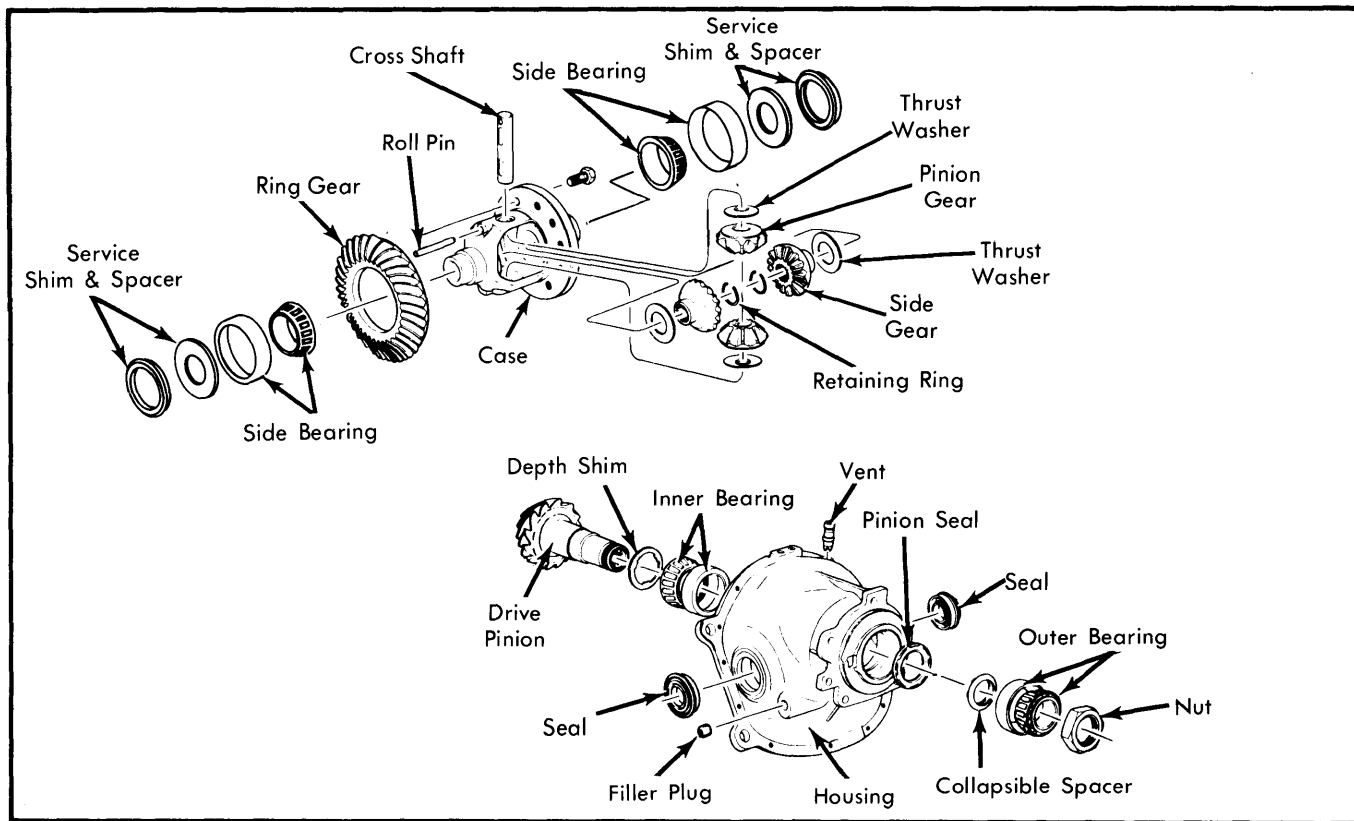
Exploded View of General Motors Front Wheel Final Drive Assembly
